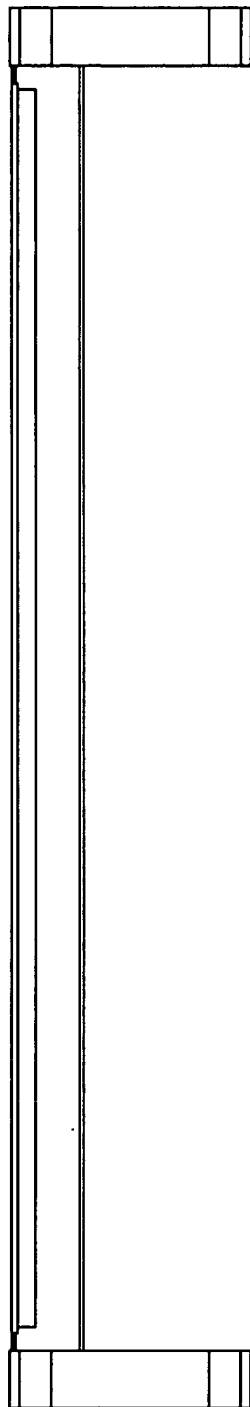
B: Right view of a ceiling frame (40 foot high cube collapsible cargo container)
